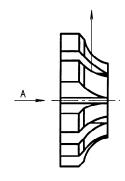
Right-hand tool when viewed in the direction of the arrow A
